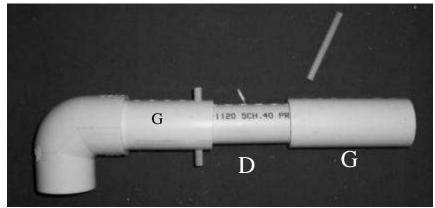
Assembly of the Medium/Large Wheelchair (Step 10).
